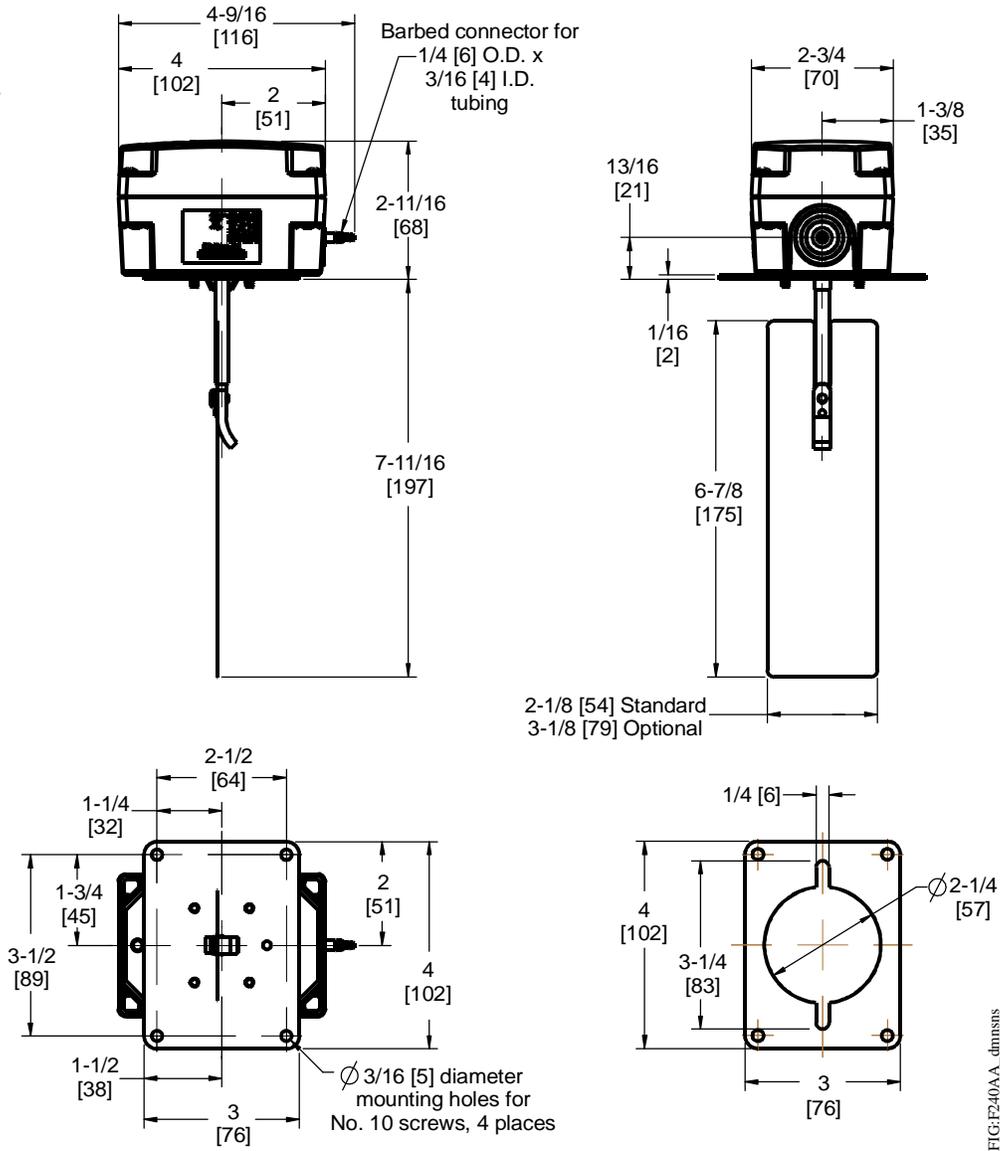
F240AA Airflow Switch with Type 3R (NEMA)/IP43 Enclosure Dimensions, in. [mm]
